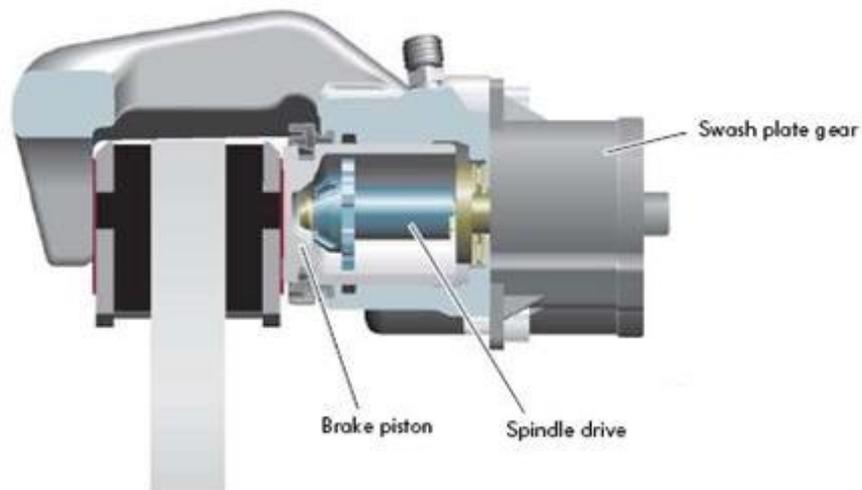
EPB System Engaging the Caliper and Rotor Components
